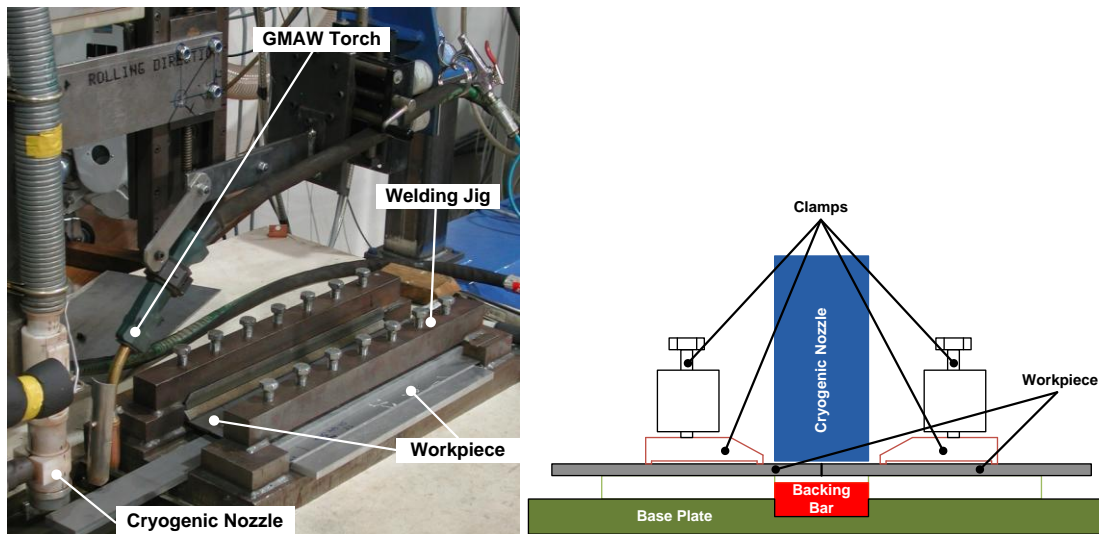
Setup2: Welding jig used on top of the seamer after raising the carriage beam.
